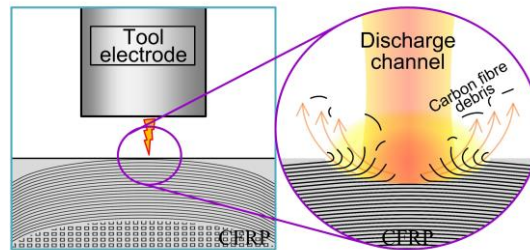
Schematic of carbon fibre removed by the jetting force during EDM.
